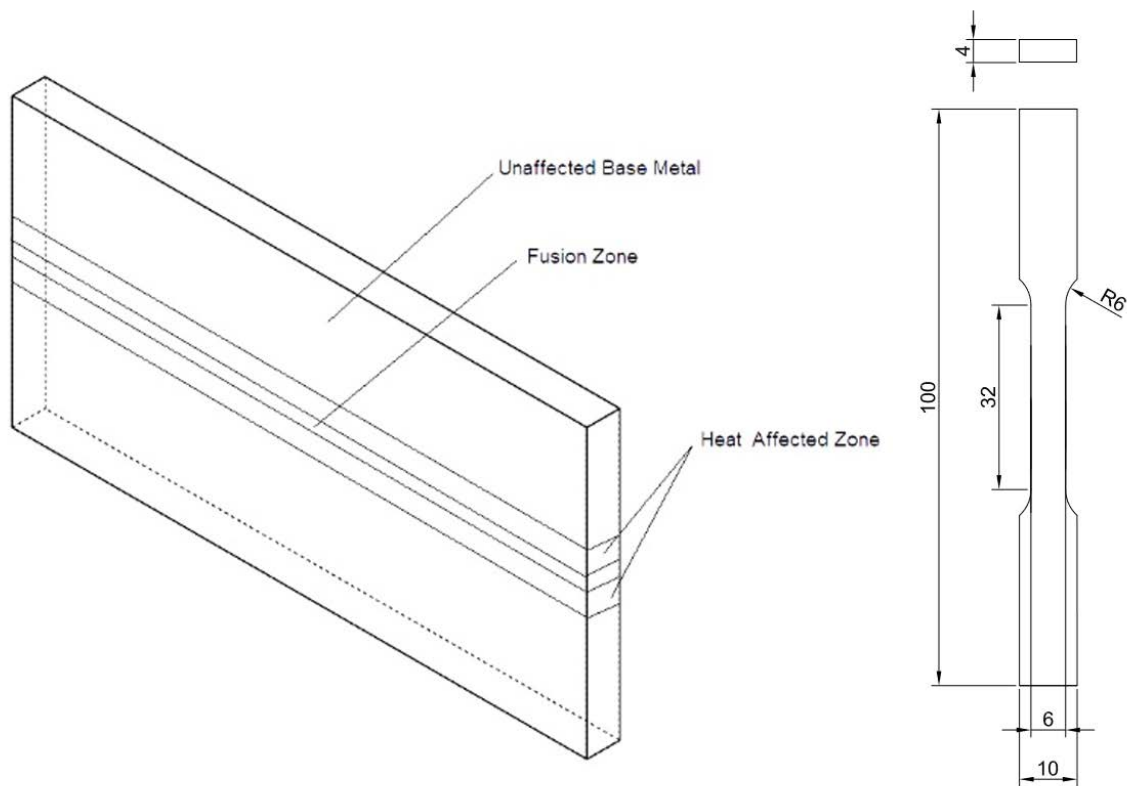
Plate zones and basic dimensions of the tensile test specimens.
